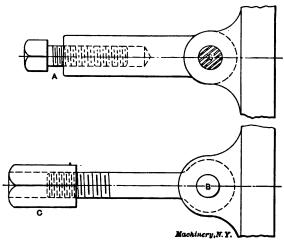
Clamping Devices Working on the Jack-screw Principle
